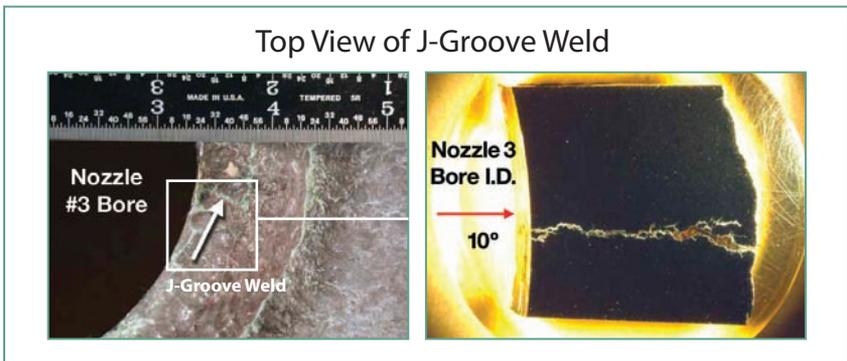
Top photo: Top view of the J-groove weld with an arrow pointing to a crack
